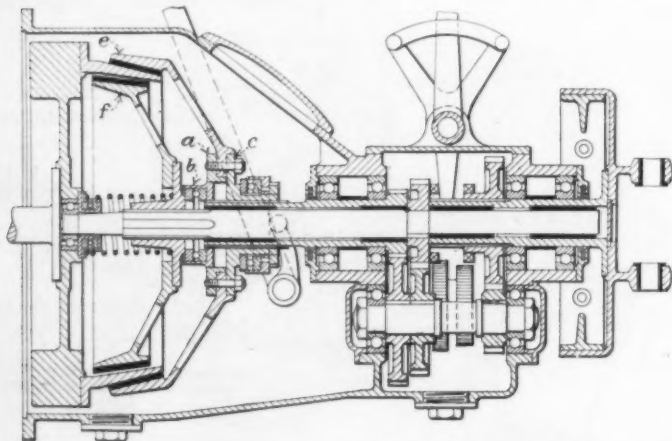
A UNIT CONSTRUCTION FOUR-SPEED GEARBOX WHICH IS CAPABLE OF BEING BOLTED TO THE REAR END OF THE CRANKCASE
